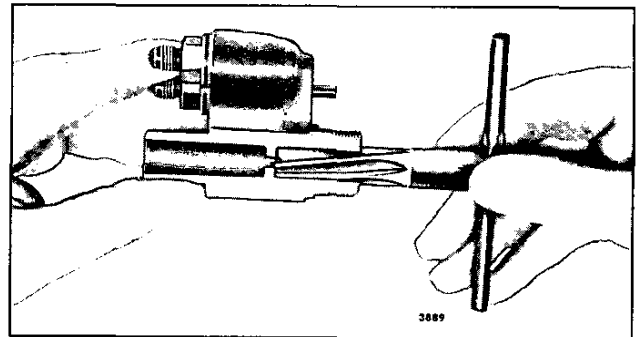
Cleaning Injector Body Ring with Tool J 21089
